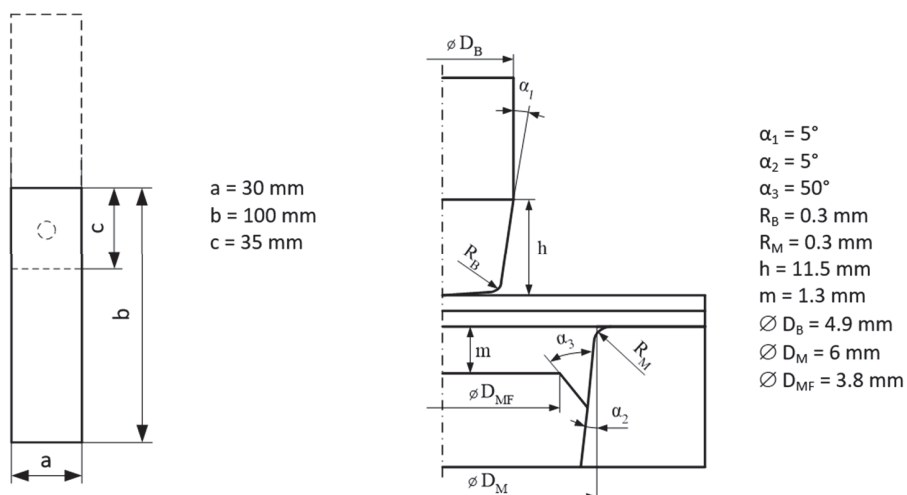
The shape of the specimens and the clinching tool and their geometrical dimensions.
